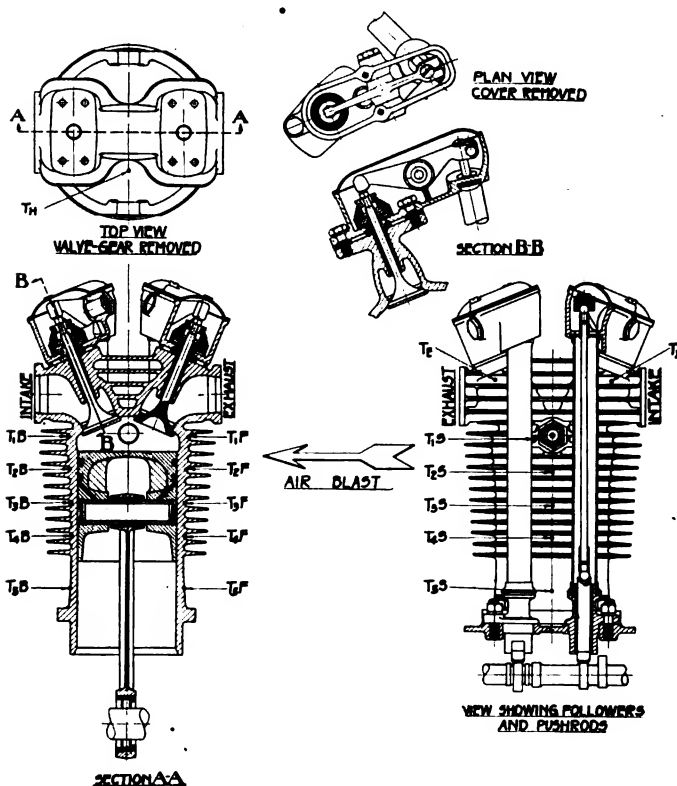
PLAN VIEW AND SECTIONAL ELEVATIONS OF THE CYLINDER USED IN THE B. S. A. PASSENGER CAR
